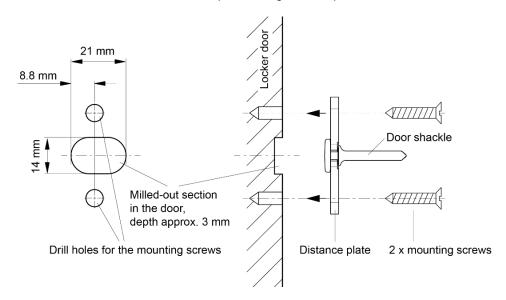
Mounting without a door plate but with a cut-out in the door
